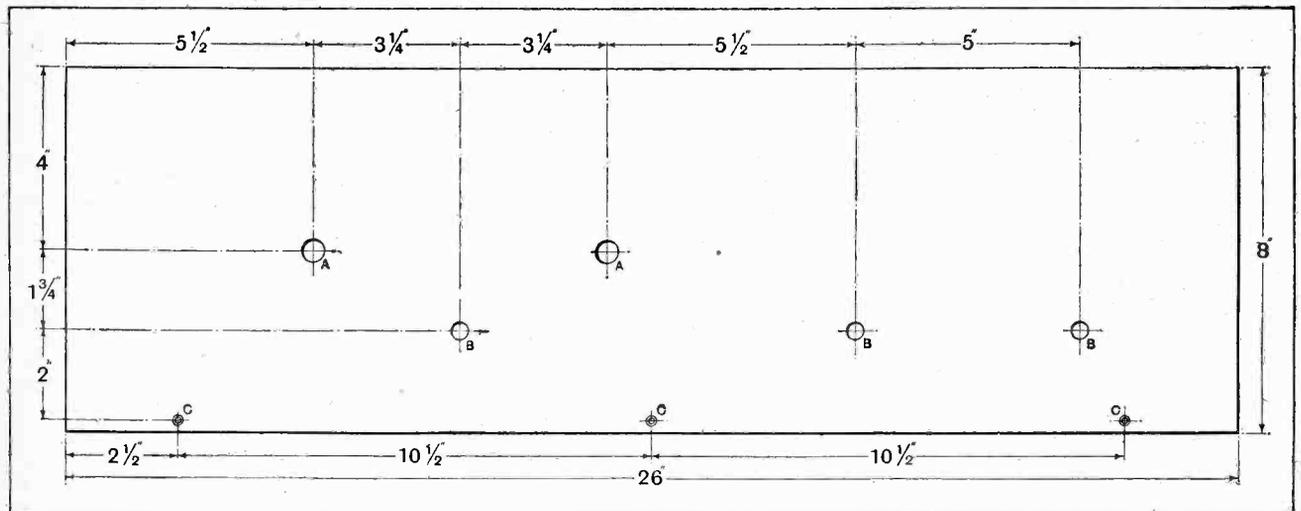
Dimensions of the panel. A, 1/2in. diameter; B, 3/8in. diameter; C, 1/8in. countersunk for No. 4 wood screws.
